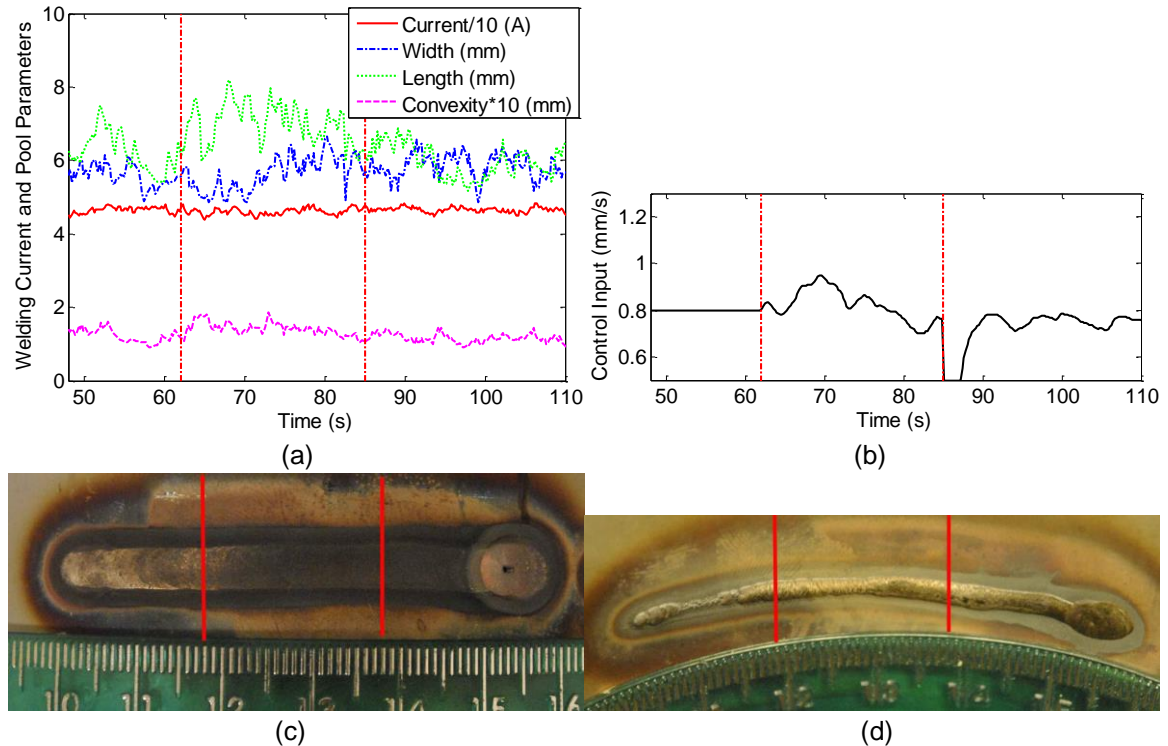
Experiment 2 results (a) Welding current and weld pool parameters (b) Control input (c) Front-side bead (d) Back-side bead.
